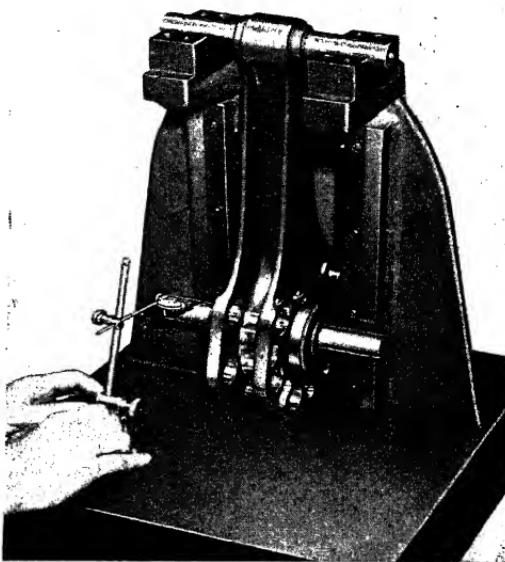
Fixture for checking parallelism of holes in a master rod.
